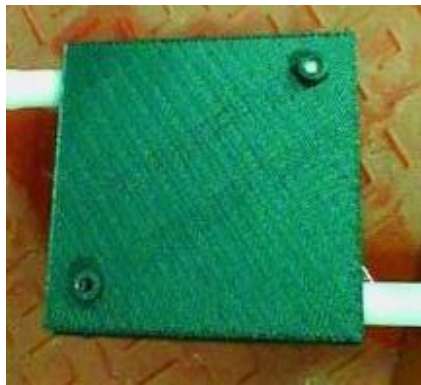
3D printed heat exchanger with Grafylon casing and PA12 duct.
